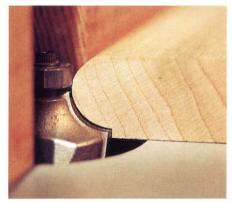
To create the bead on the bottom edge of the bullnose molding, raise the roundover bit 1/8" when making the second cut.
